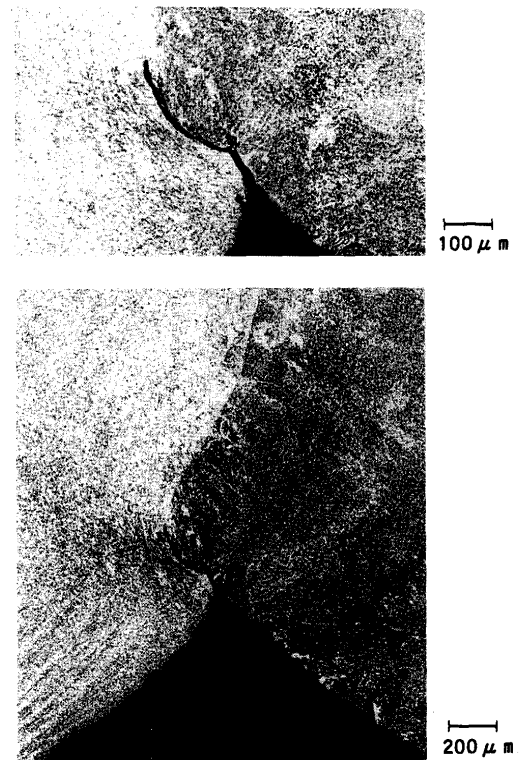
An example of a very small flaw in the actual multi-layer welded joint with single-bevel groove.
